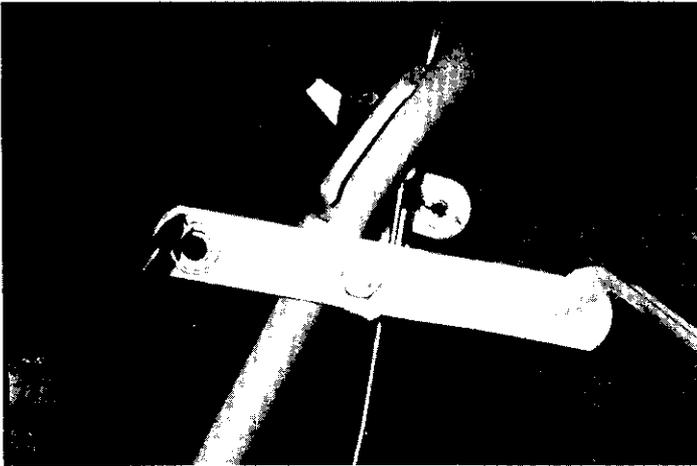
Install the Wheel Drive Control rod on top and insert cotter pin. Then, open its bottom to securely fasten it.
